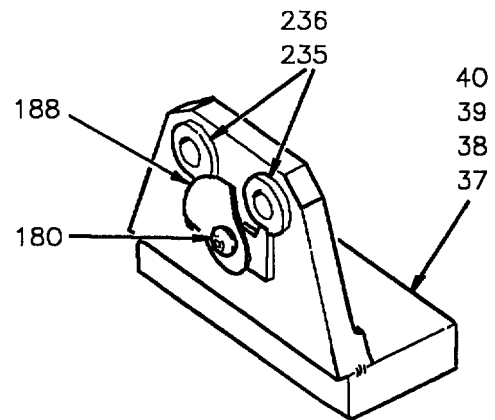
Installation of Flap with Damaged Bushings into Fixture (Sheet 2)
